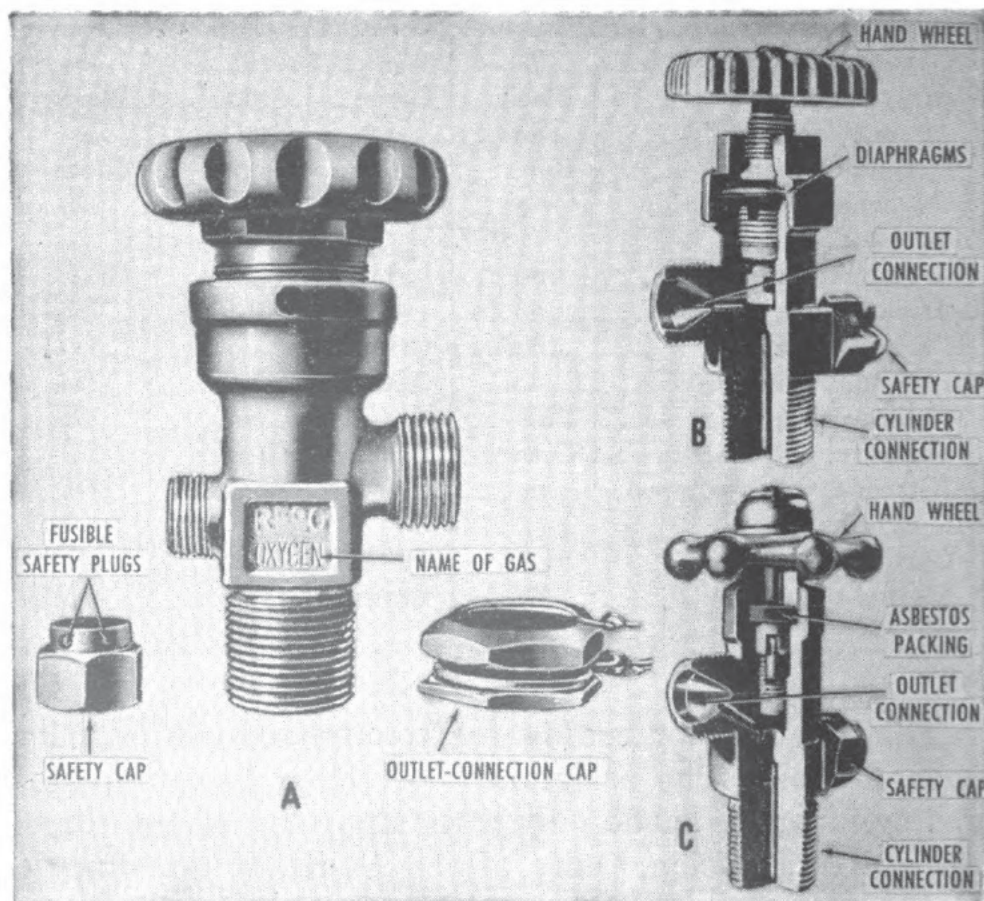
Oxygen cylinder gas valves: (A) external view of one type valve, with related safety and outlet-connection caps; (B) cutaway view of same valve, showing diaphragms to prevent gas leakage when valve is opened; (C) cutaway view of another type valve, with asbestos packing to prevent gas leakage when valve is opened.
